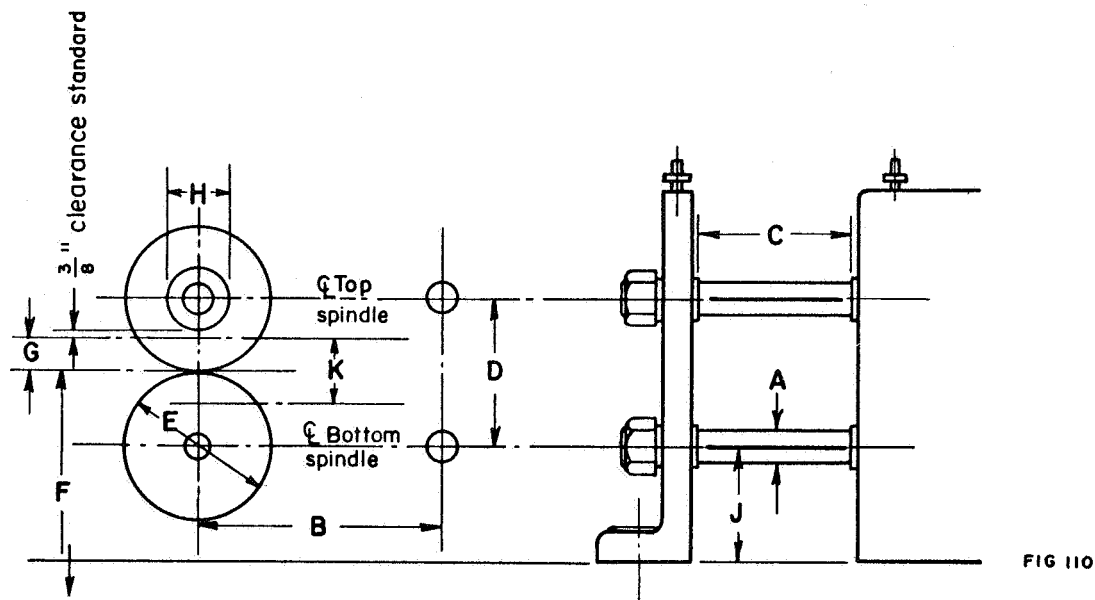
SKETCH SHOWING DIMENSIONS IN ROLL-FORMING STAND MENTIONED IN TABLE XXXIX
